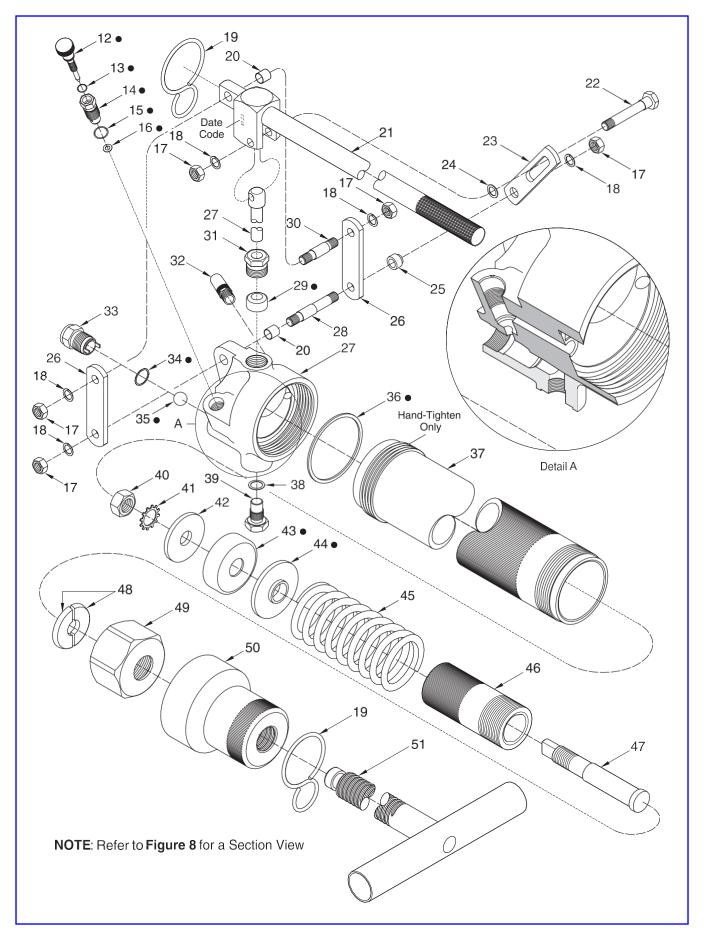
B High-Pressure Screw Prime Injector - Model -= 6299-2 - Exploded View
